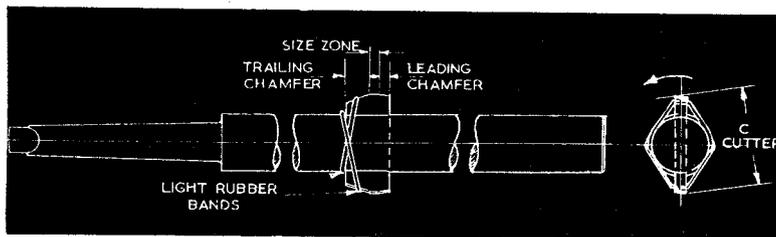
Section drawing showing typical arrangement of a floating finish boring cutter in rotating bar
